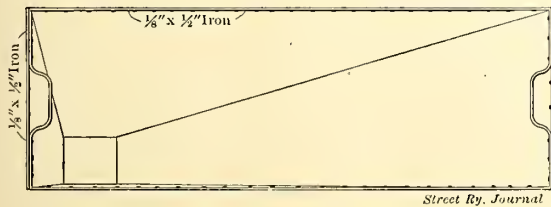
PLAN OF SAND-BOX, WASHINGTON CAR
